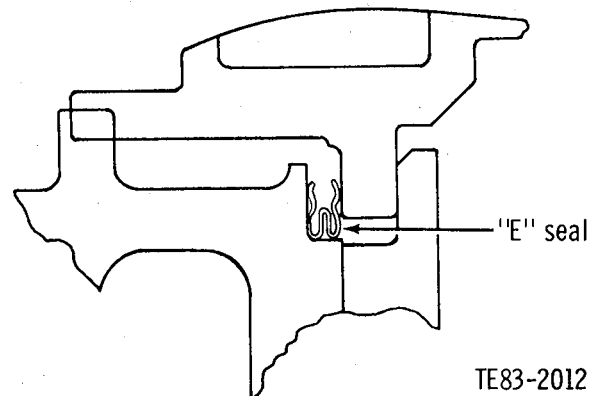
Sealing of leakage around flange of ceramic inner vane support ring using "E" seal.
